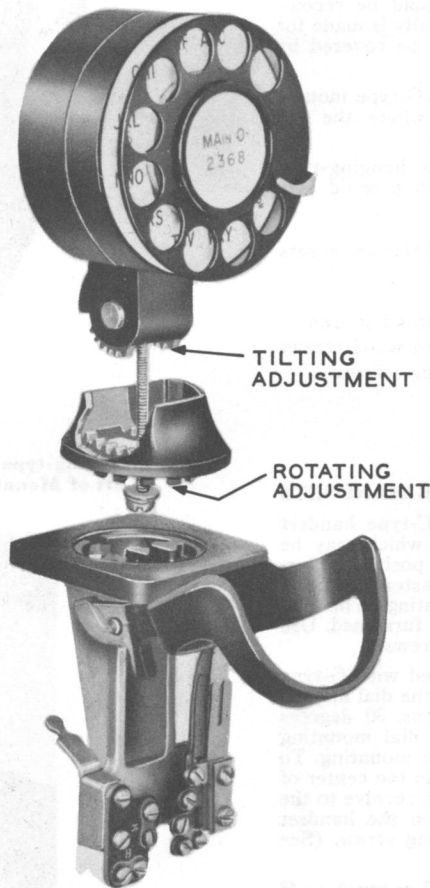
Positioning Adjustments of 43A Dial Mounting Used with G-type Handset Mounting
